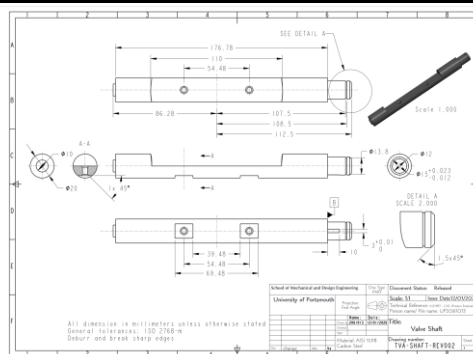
Shaft Handle Detailed Drawing (Non-Standard Part)
